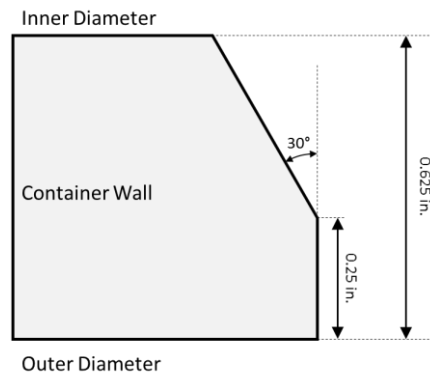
Edge preparation prior to welding used for both circumferential and longitudinal welds.
